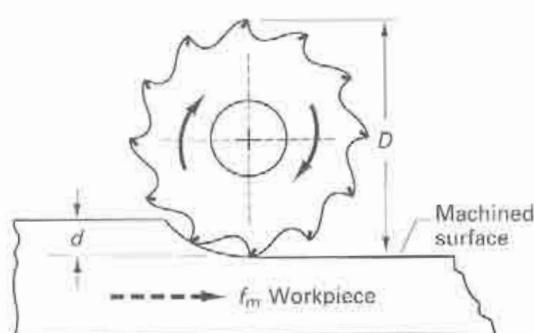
Slab or side milling being done as a down milling process with horizontal spindle-machine.
